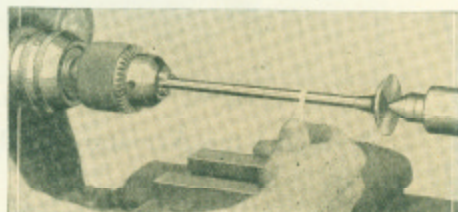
Testing and Straightening a Bent Valve Stem in the Lathe
